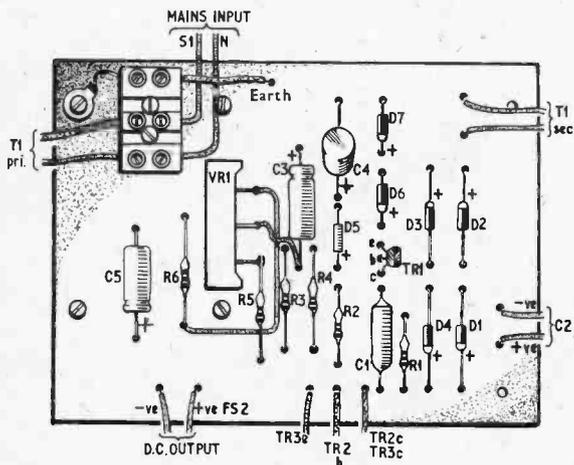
Component assembly on p.s.u. printed circuit board
